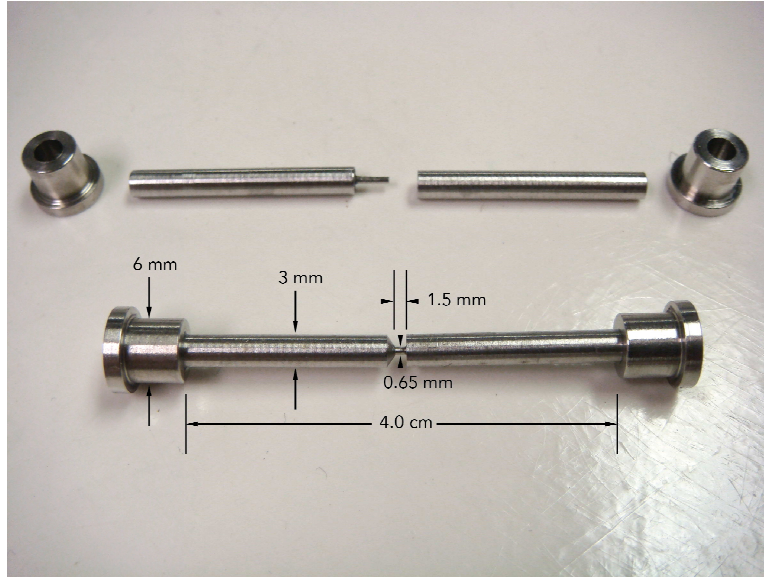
Specifications of the metal molds. Each set of mold consists of 2 caps and 2 central mandrels. The mold will generate a collagen tube of 3 mm inner diameter, 6 mm outer diameter and a constriction nozzle in the middle of 0.65 mm inner diameter.
